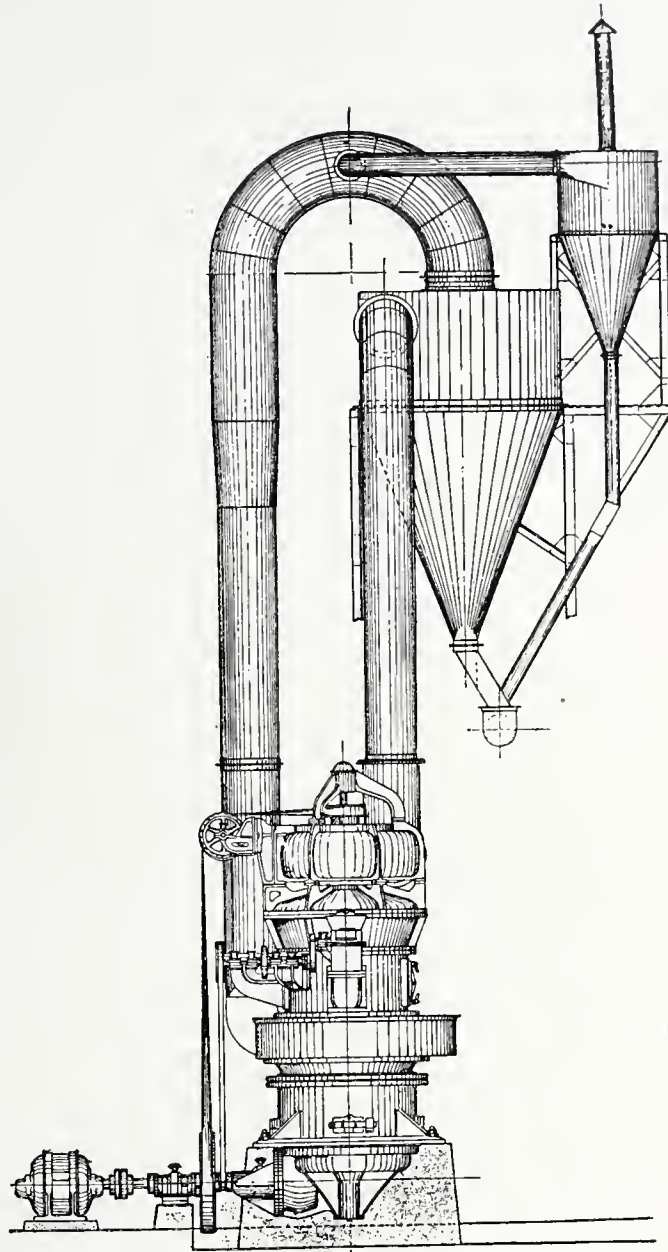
Fuller Air-Separator Mill and Cyclone Separators.
